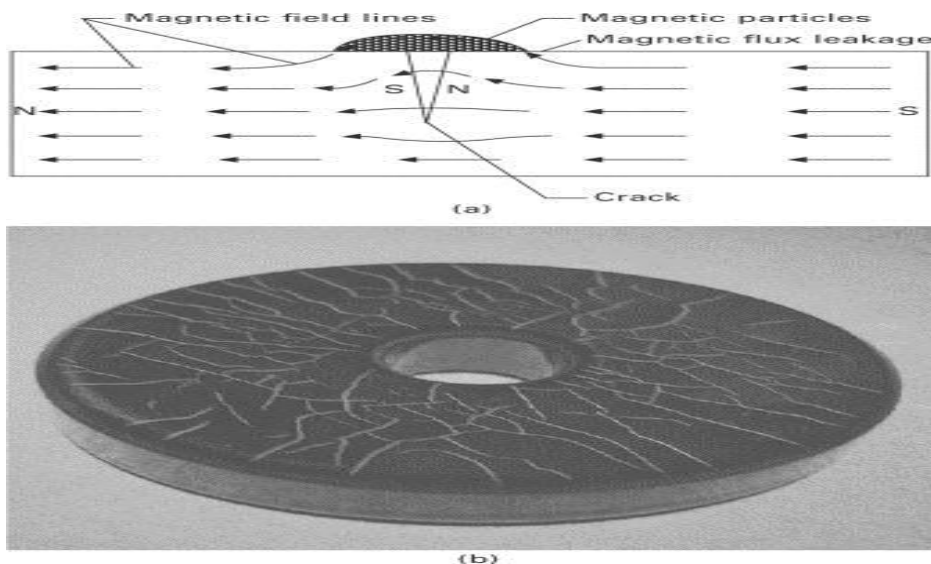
MAGNETIC PARTICLE INSPECTION OF CASING
